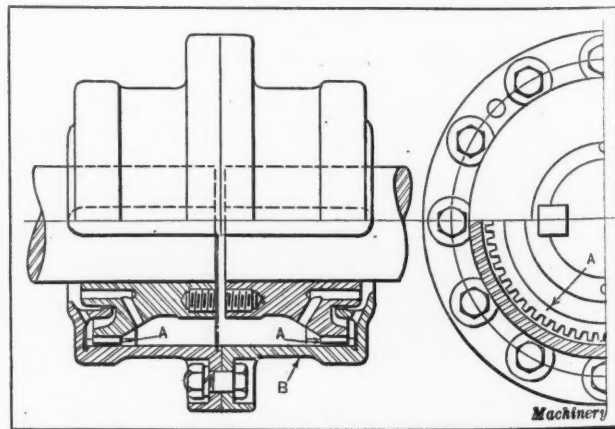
Design with Toothed Hubs and a Floating Internal Gear
